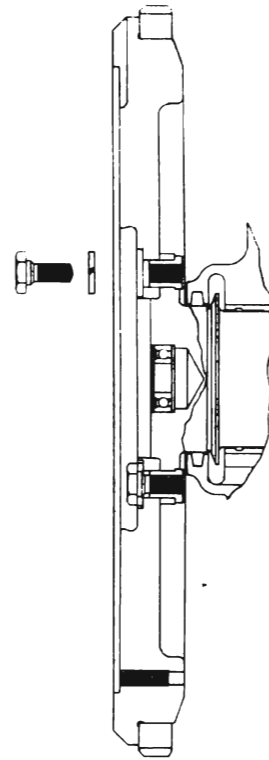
Flywheel Bolt Removal—Series 60-70-90
